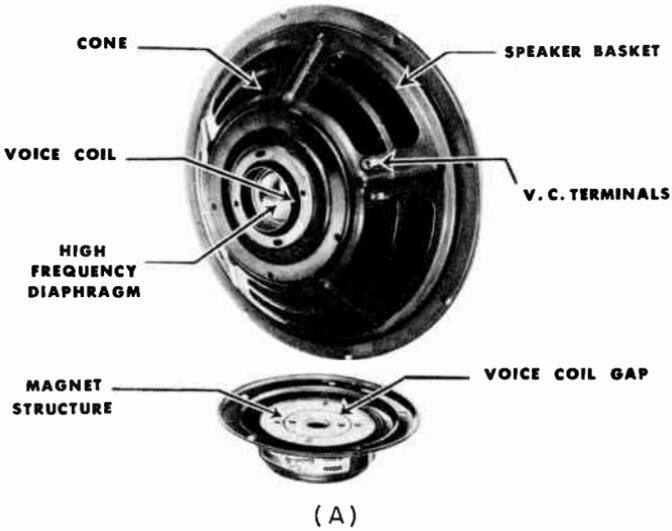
An exploded and cut-away view of a dynamic loudspeaker. (Courtesy University)
